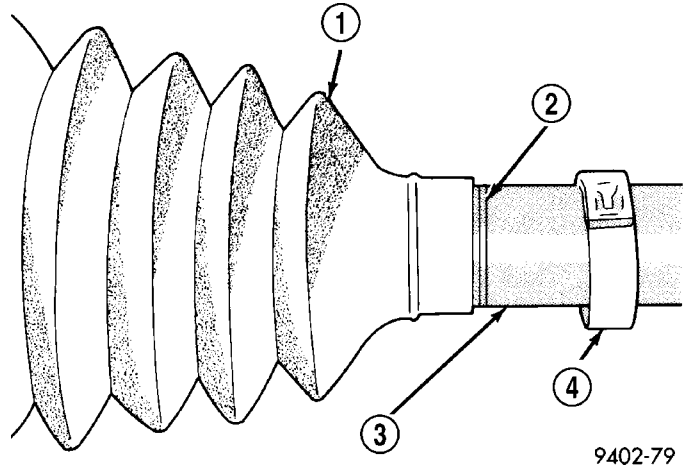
Seal Boot Correctly Positioned On Interconnecting Shaft
